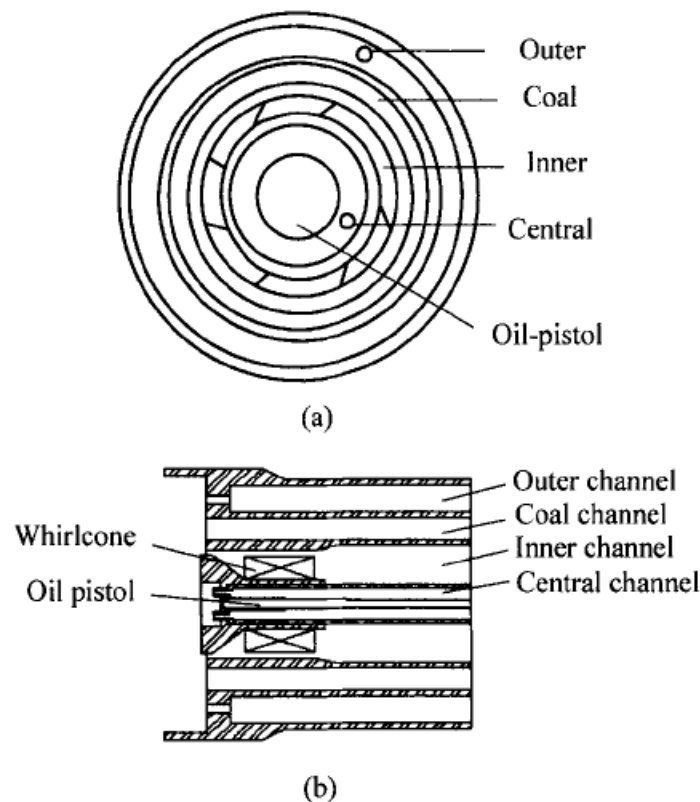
Sketch of four air channel burner (a)Radial section; (b) Axial section [84].
